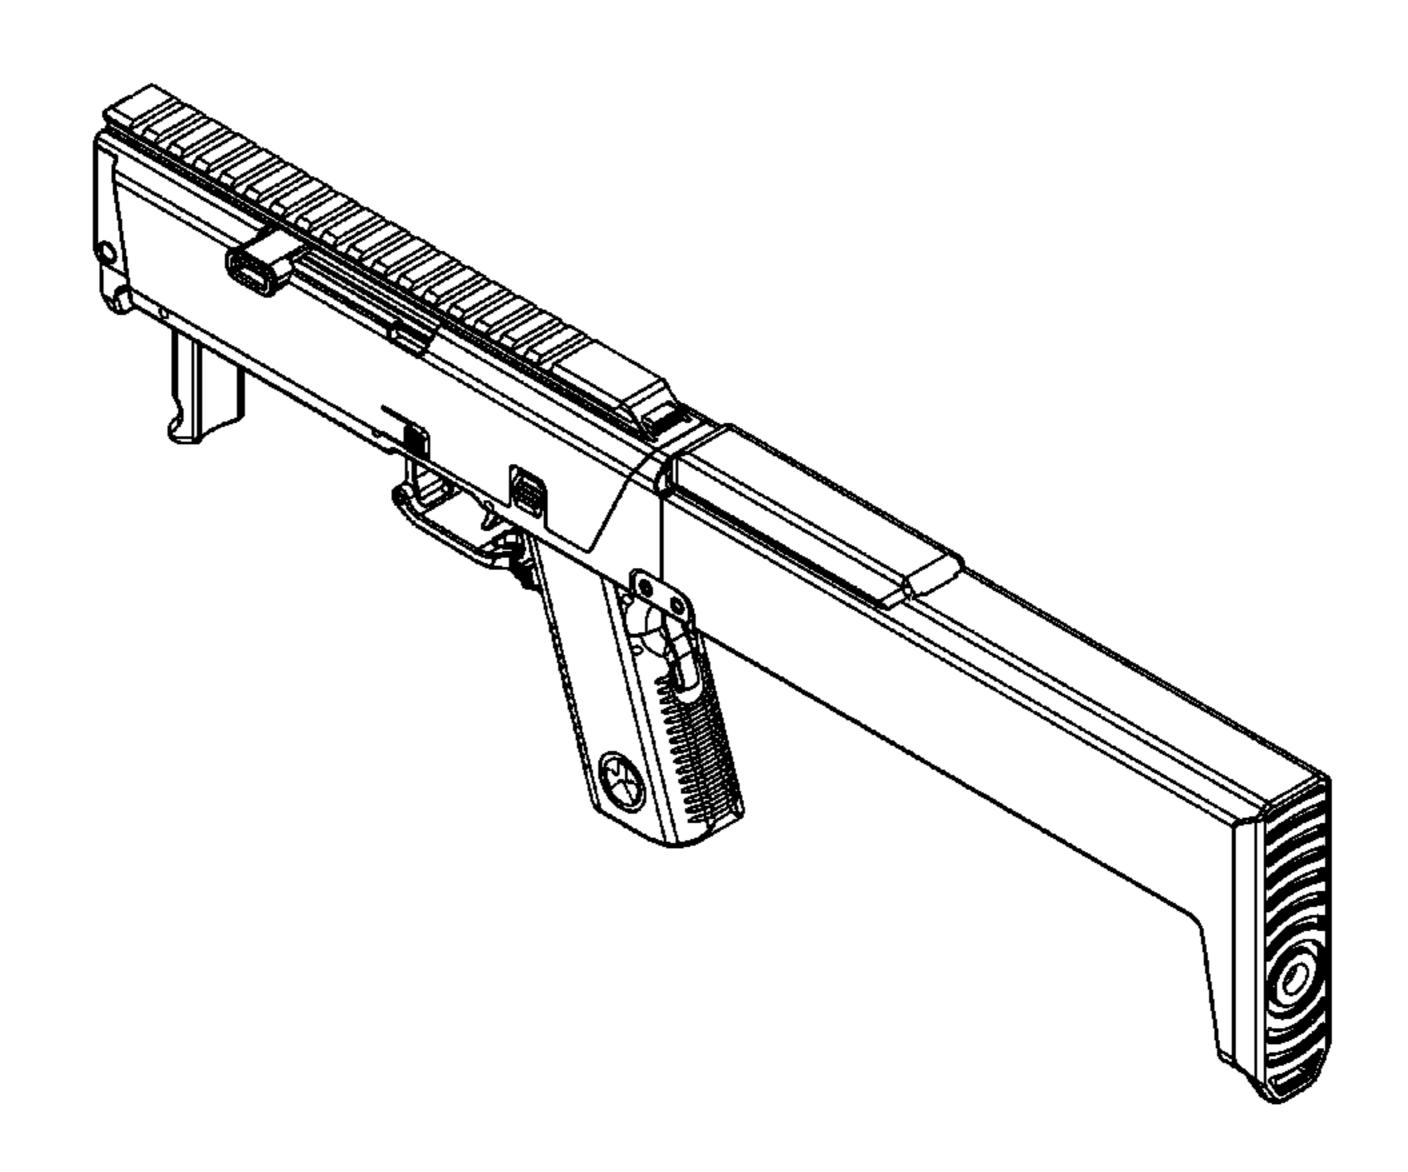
is a bottom/rear/left perspective view of the firearm, closed.
